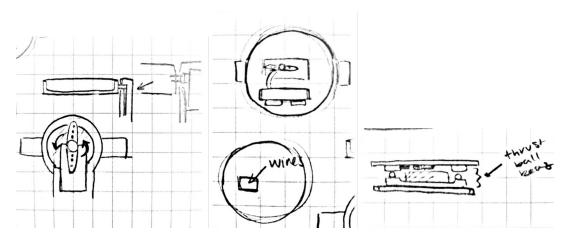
Sketch of internal mechanisms detailing rotations and wiring
